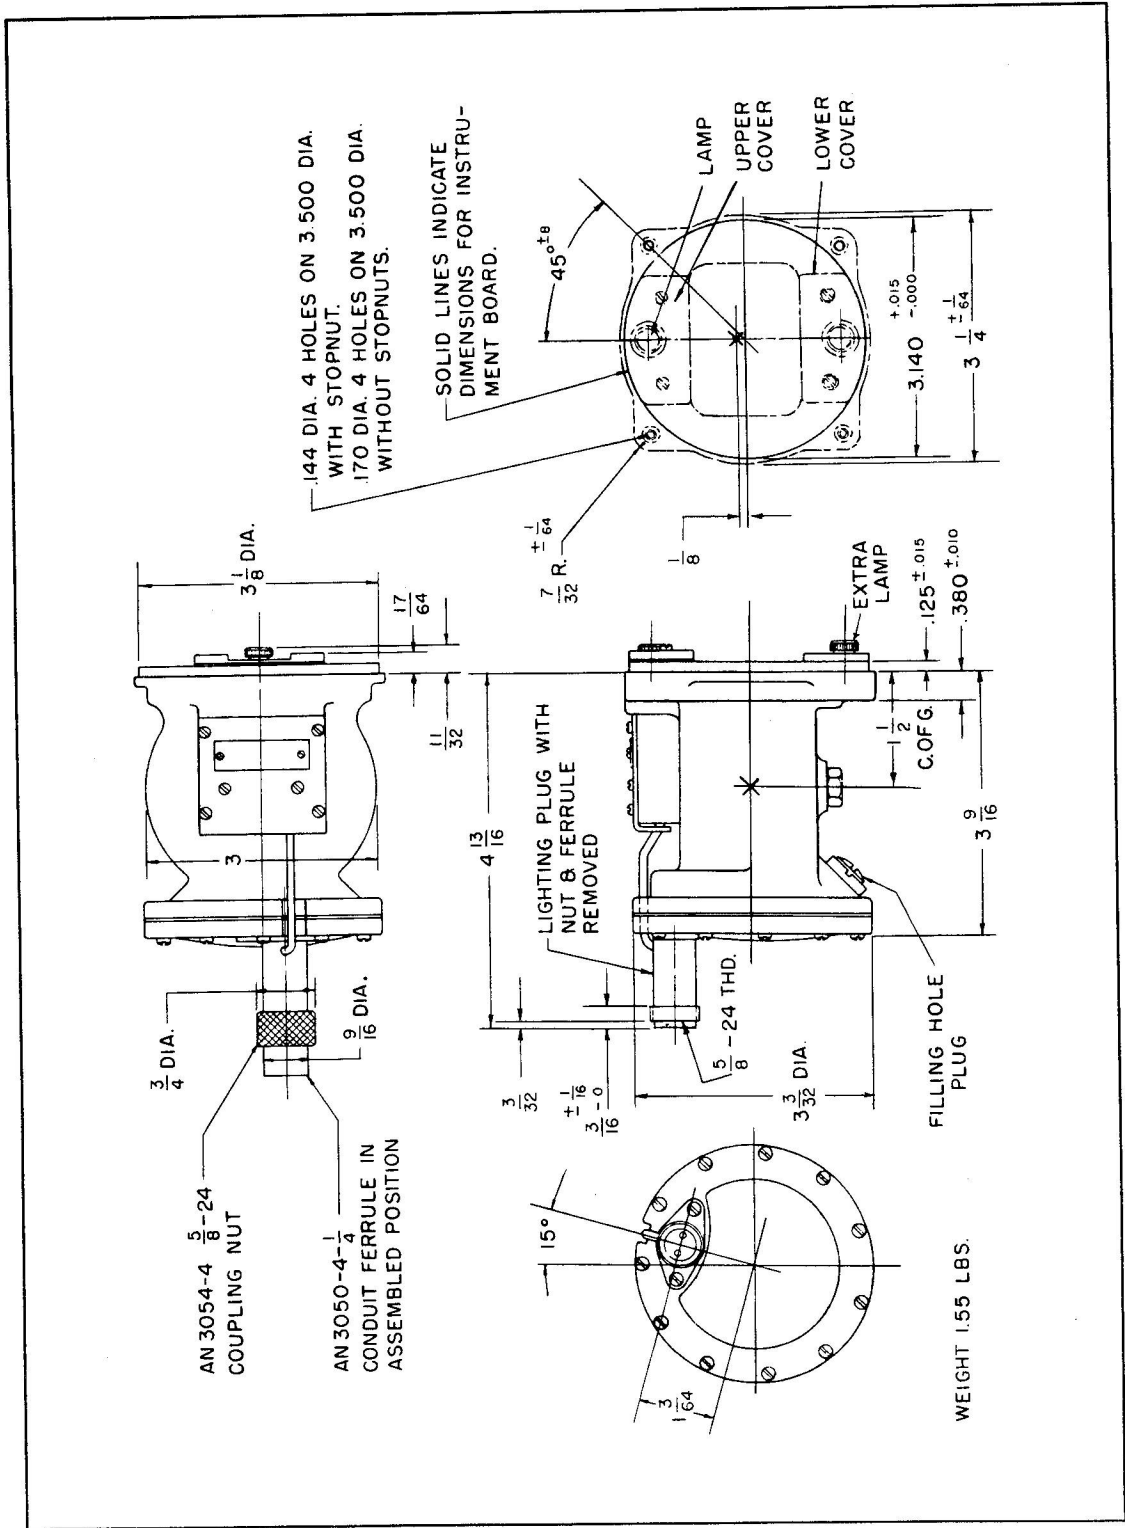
Dimensional Drawing Type B-16 (Pioneer Type 1821-2-A)
